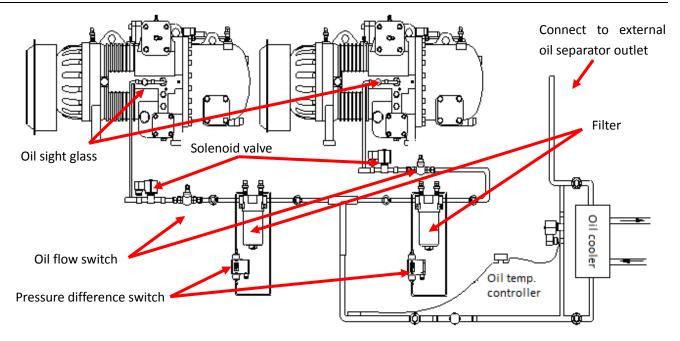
~280-PLUS-P Piping drawing of external oil cooling circuit
